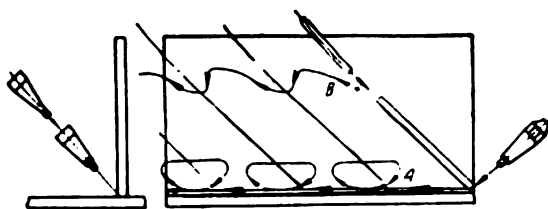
Diagrammatic representation of the travel of the soldering burner (A) and the soldering rod (B) during soldering:
